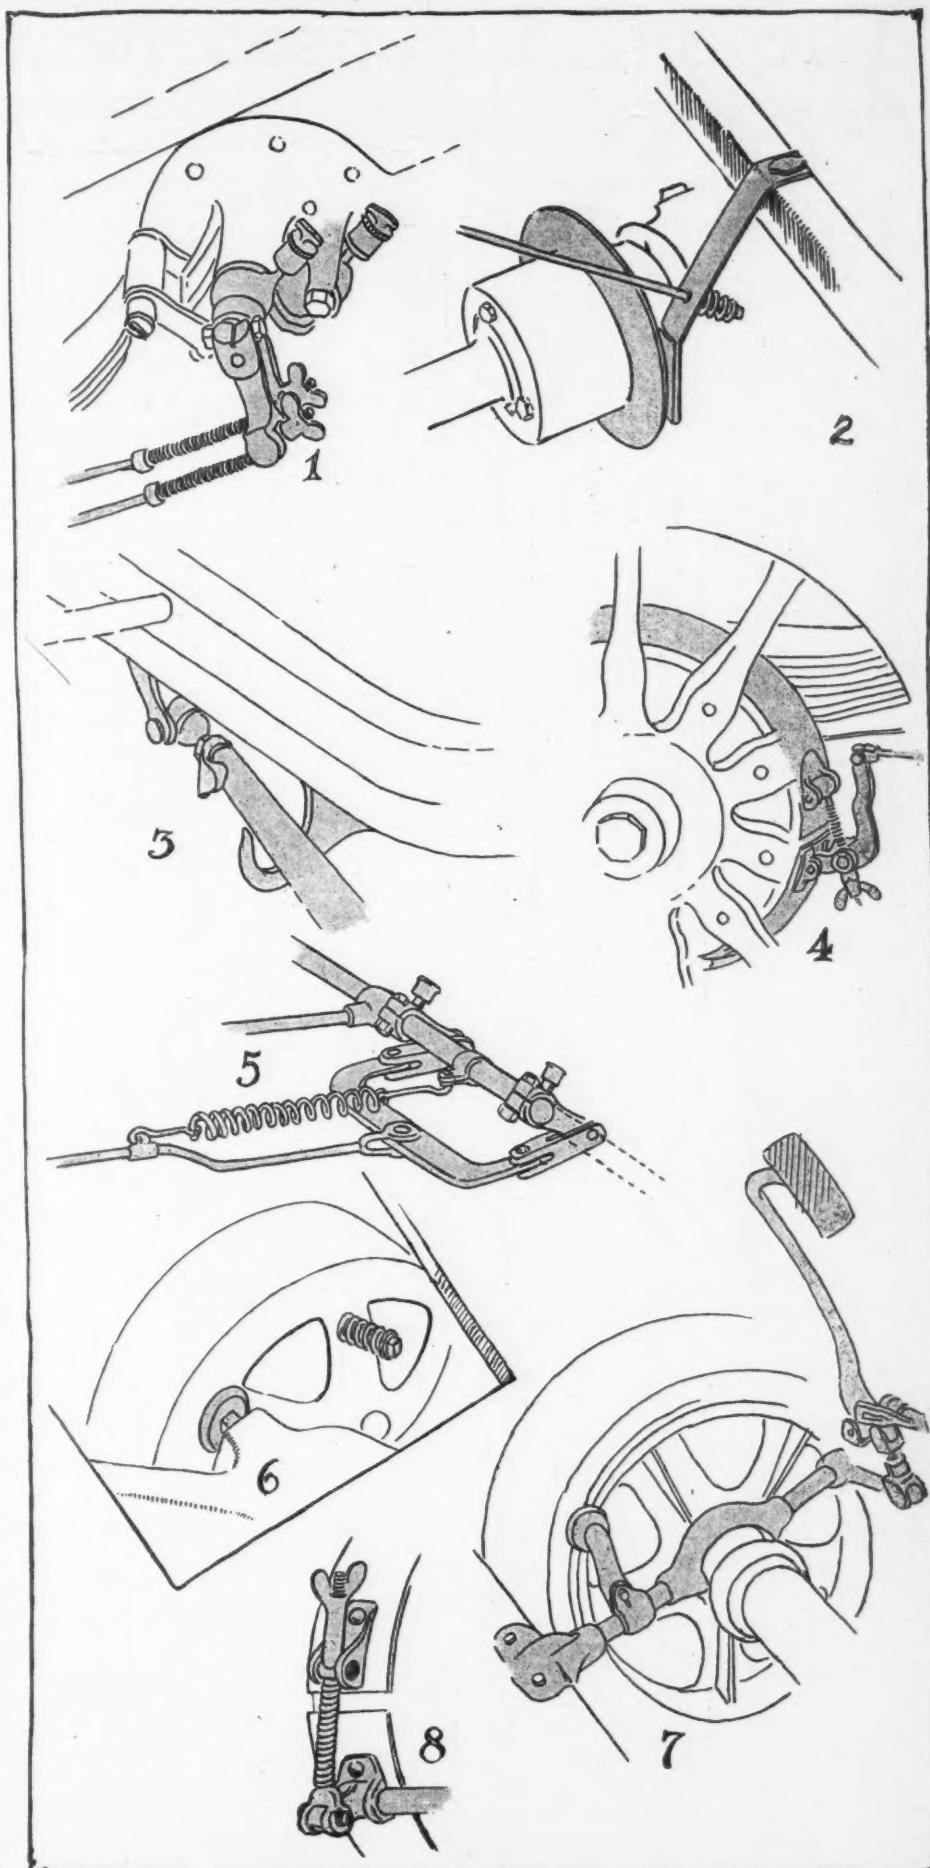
1, ALCO BRAKE ADJUSTMENT AND OILING; 2, CADILLAC CLUTCH BRAKE; 3, ALCO'S RADIUS ROD AND PROTECTOR; 4, CONVENIENT BRAKE ADJUSTMENT; 5, REO BRAKE EQUALIZERS; 6, OVERLAND CLUTCH BRAKE; 7, SPEEDWELL CLUTCH BRAKE; 8, WINTON BRAKE-BAND ADJUSTMENT
